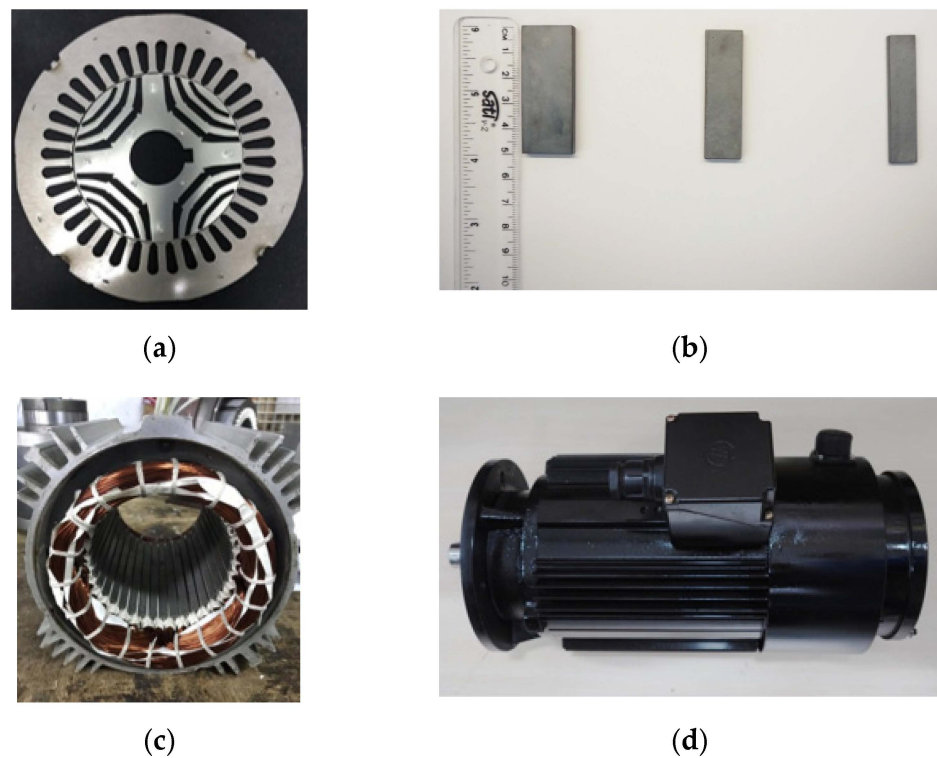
Parts of the PMASynRM and the complete assembled motor: (a) rotor and stator; (b) ferrite PM; (c) winding; and (d) complete assembled motor.
